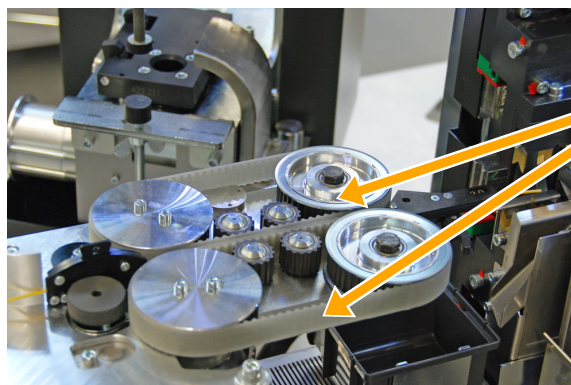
CrimpCenter 36 SP - Swivel Side 1
